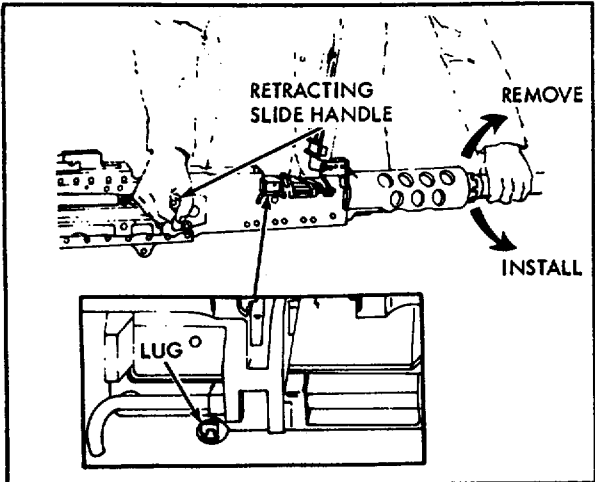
Removal/installation - 7.62 mm machine gun flash hider
